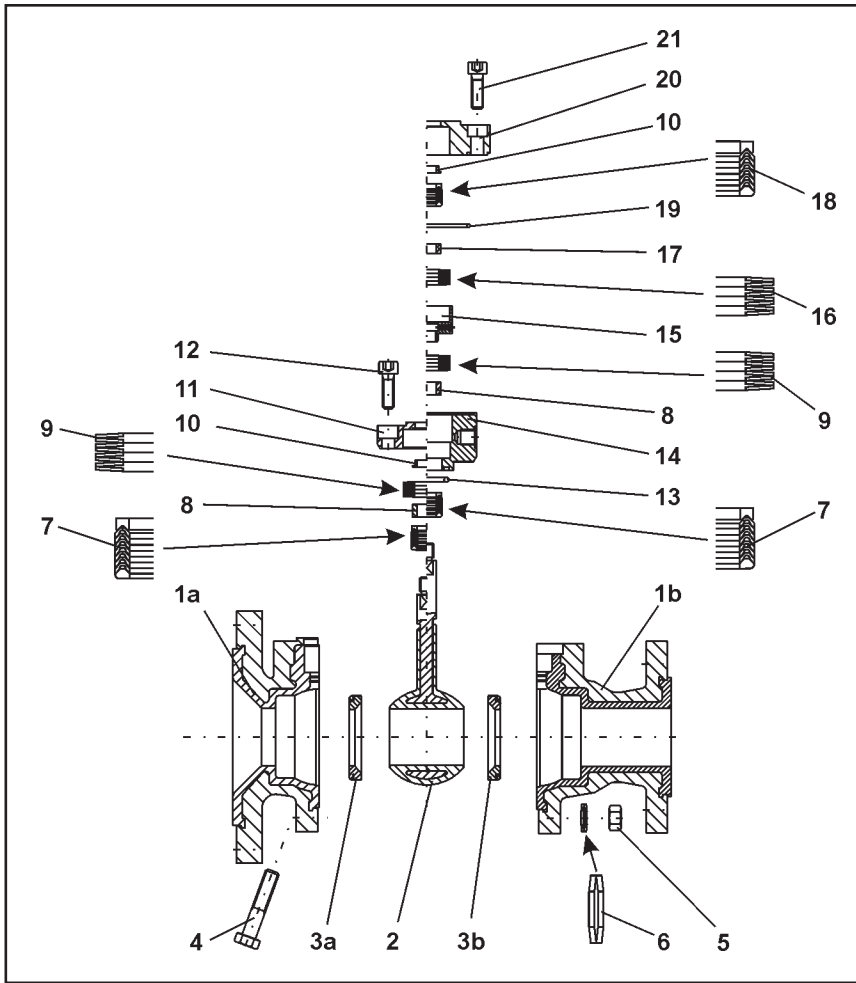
Detail drawing of the drain ball valve Series 21a
